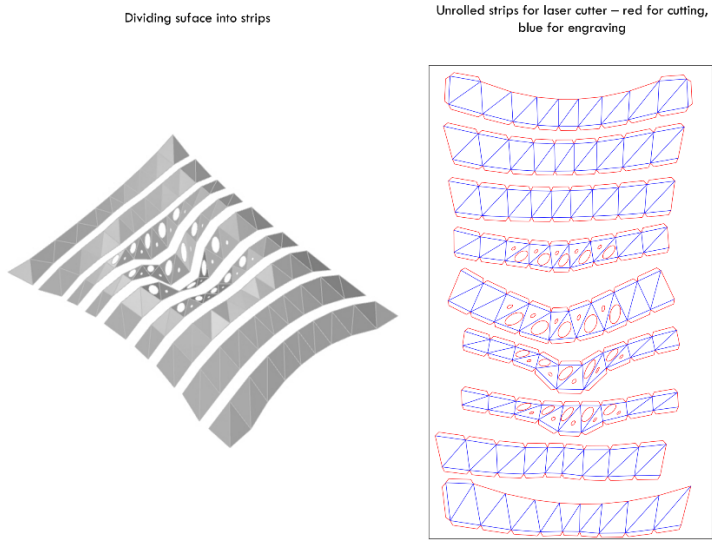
Dividing the surface into stripes and unrolling them for fabrication using a laser cutter
